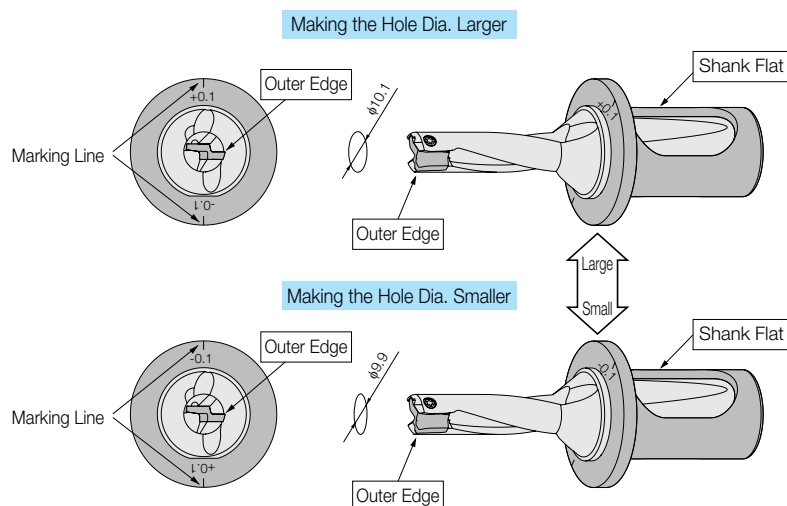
Diameter Adjustment Method (e.g.) Ø10mm Drill
